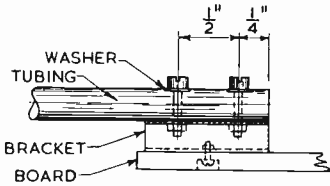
Details for drilling and fixing the aerial elements to the brackets.
